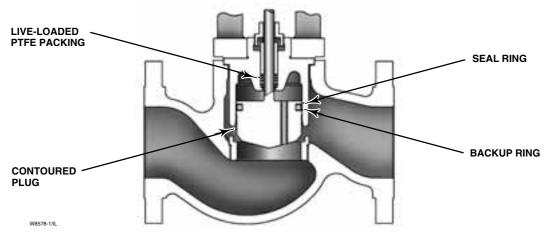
Design GX Control Valve with Balanced Trim (Port Sizes of 70, 90, and 136 mm Only)
